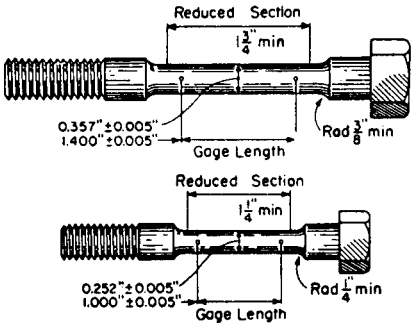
EXAMPLES OF SMALL SIZE SPECIMENS PROPORTIONAL TO STANDARD 2-IN. GAGE LENGTH SPECIMEN
